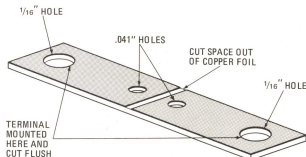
LED MOUNTING STRIP made from a small piece of single-sided printed-circuit board. Mini-terminals fit the outer holes.
